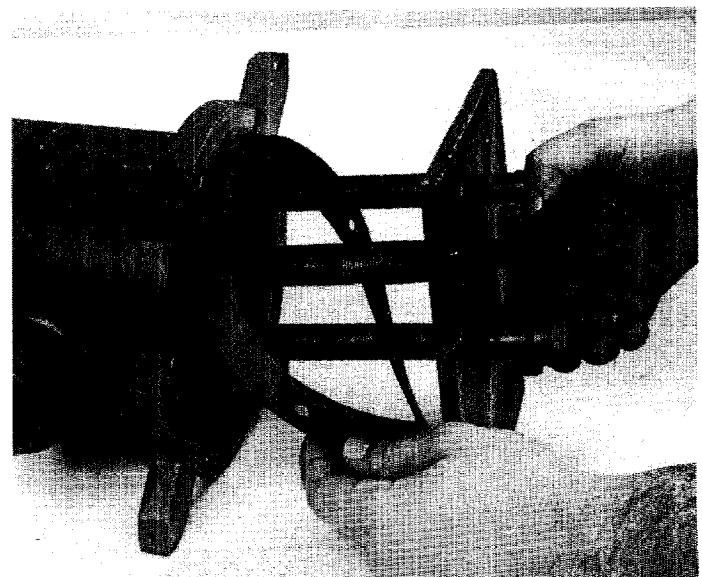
Removing Drum End Plate, Including Water Coil and Gasket
